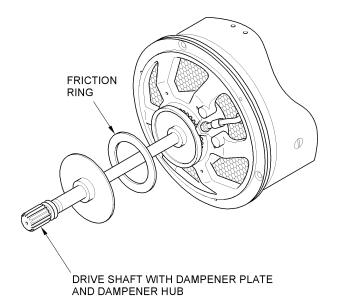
Removing The Drive Shaft, Friction Ring and Dampener Plate
